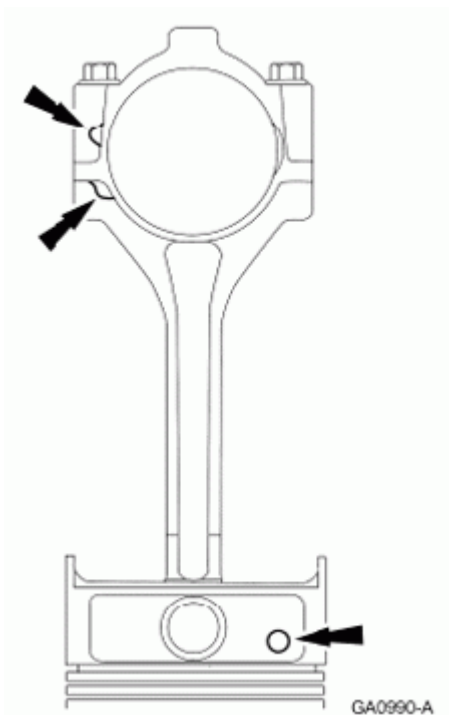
Locating Connecting Rod And Piston Identification Marks
